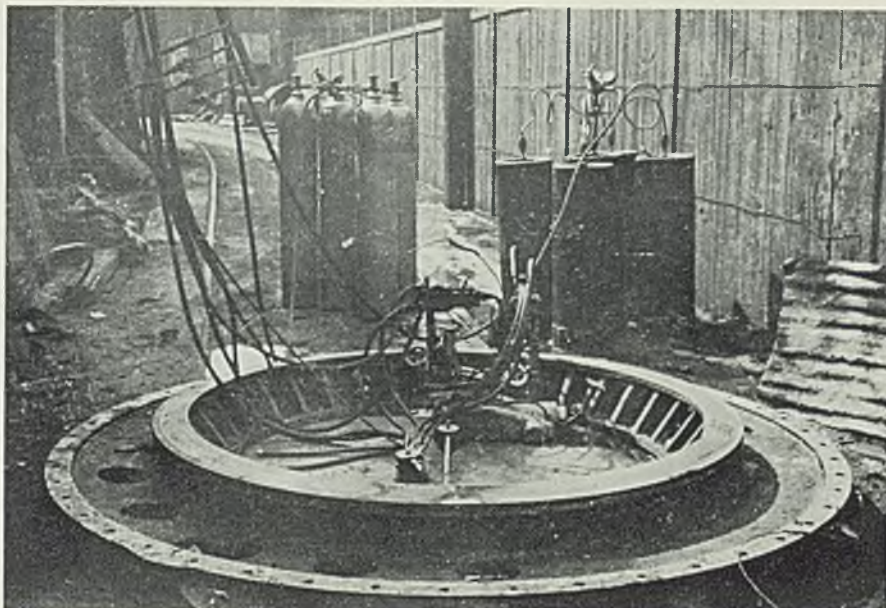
This view shows progressive hardening of a circular path on a 4000-pound steel casting
